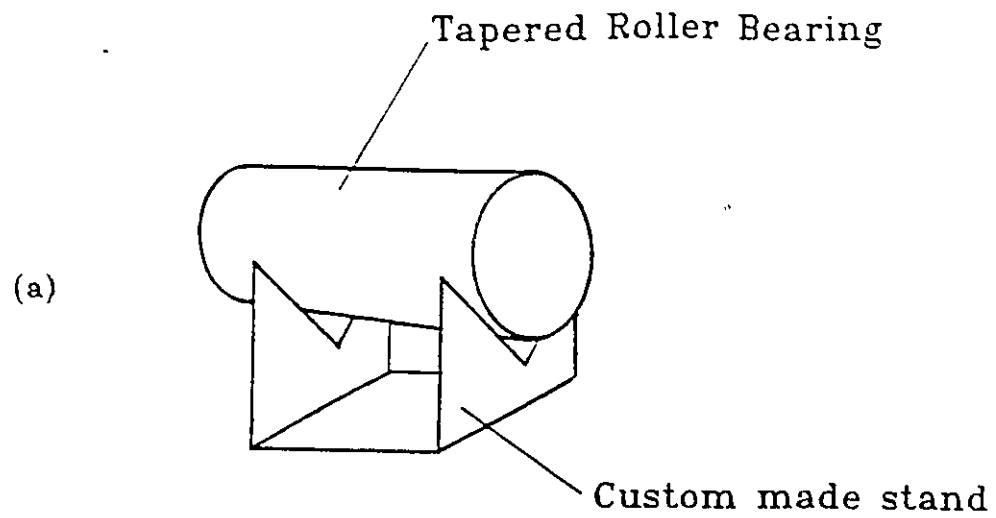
Tapered roller bearing held by the custom made stand to provide a horizontal surface
